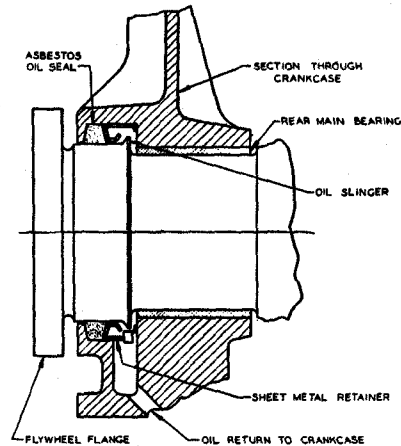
Rear main bearing oil seal used on all 38-series engines
